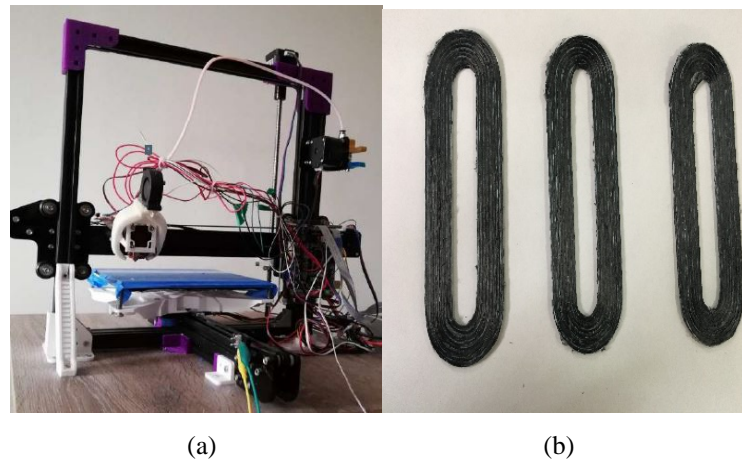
Additive manufacturing of CFRTP samples; a) Custom 3D printer and b) Bending Test Specimens
